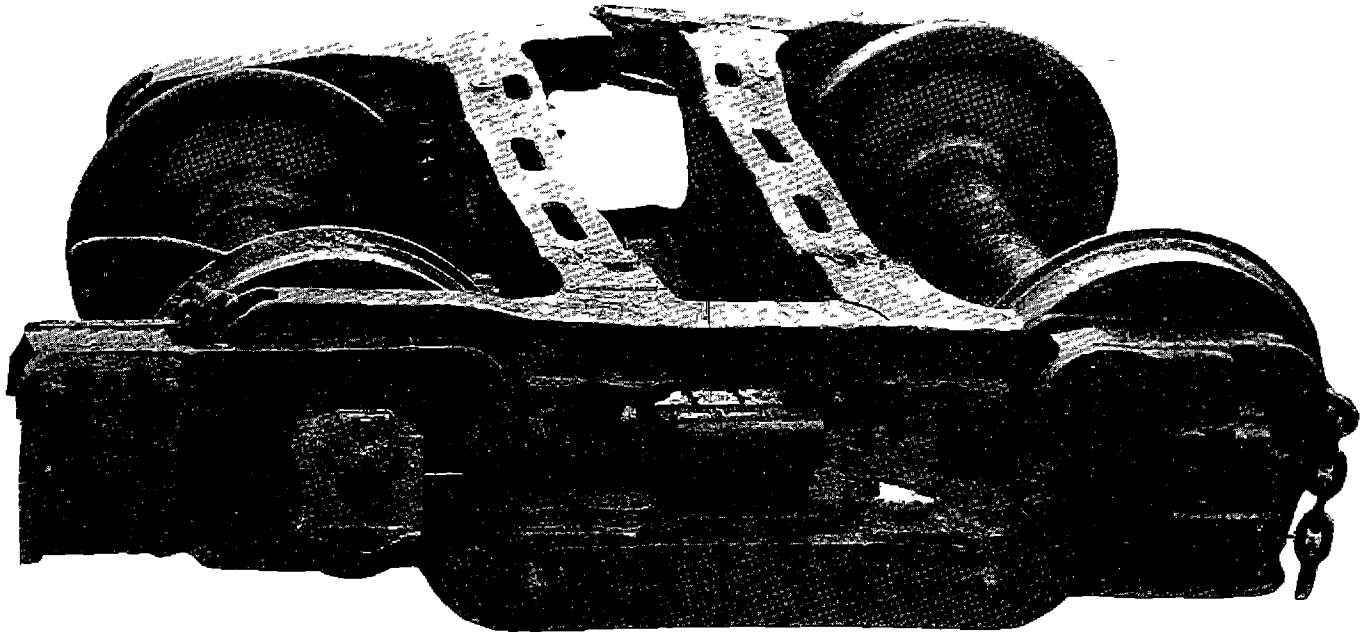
Forward tender truck Parts reassembled after the derailment View of right side
